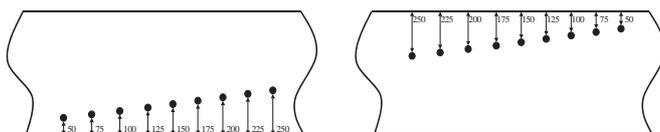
Test sheet with 1 mm holes drilled through the sheet.
